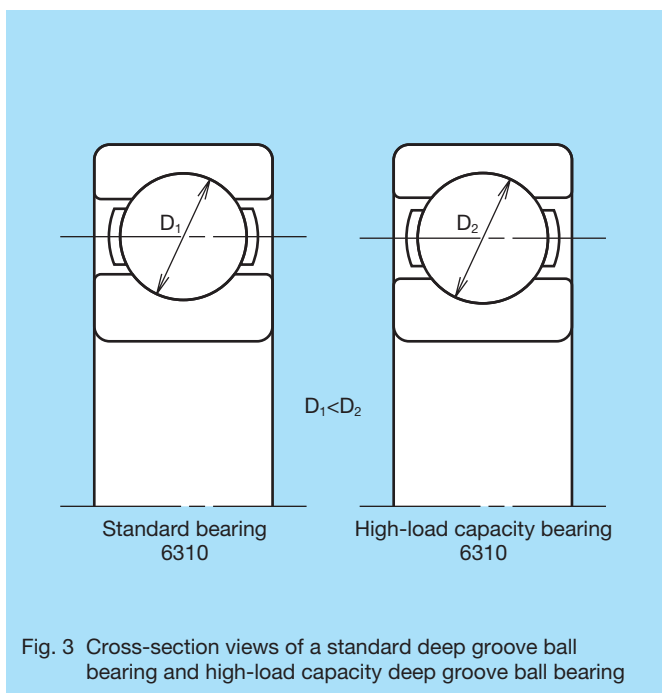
Cross-section views of a standard deep groove ball bearing and high-load capacity deep groove ball bearing
